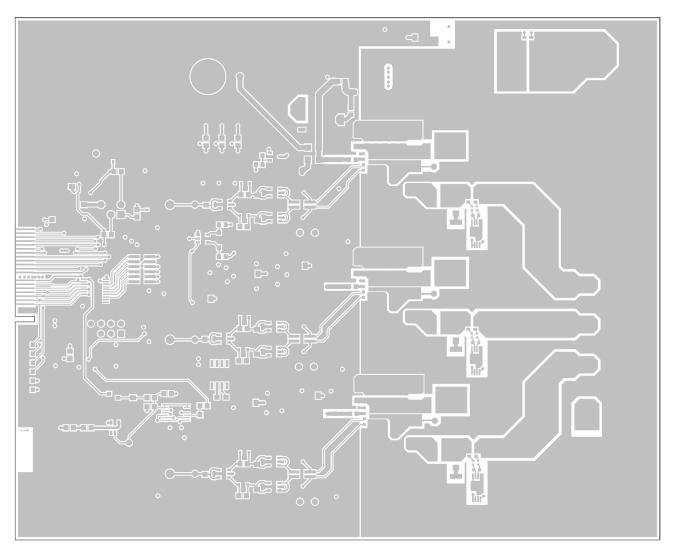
EPC7C021/EPC7011L7 3-Phase Motor Driver Evaluation Board Top Copper Etch (2 oz).
